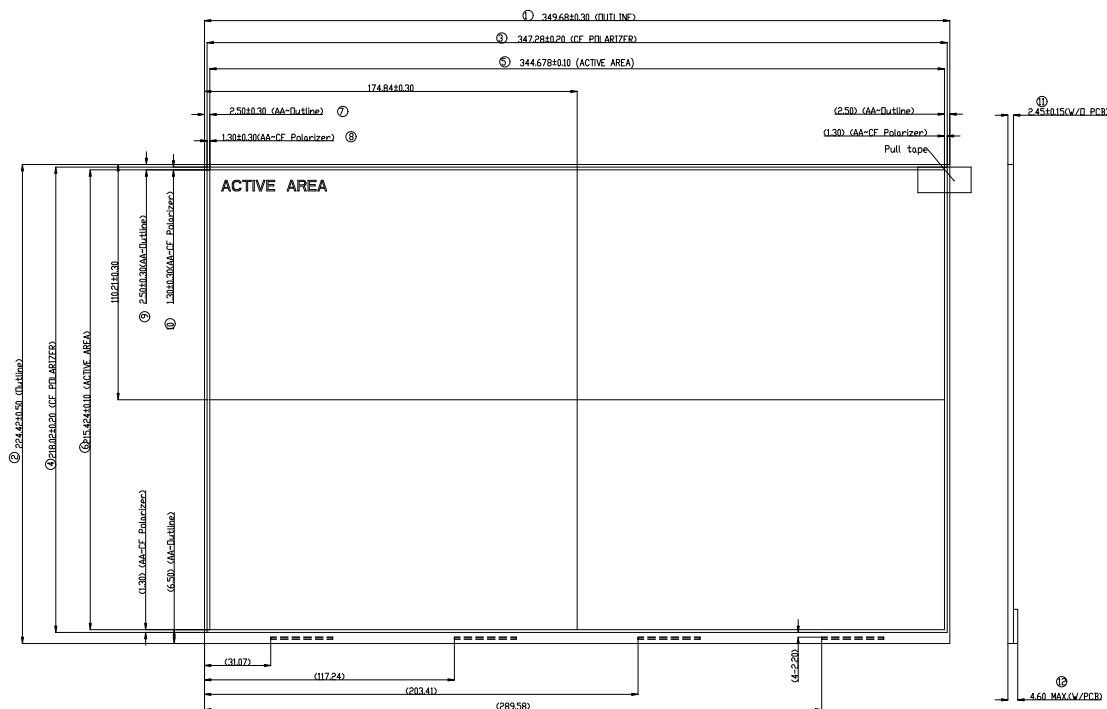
TFT-LCD Module Outline Dimension (Front View)
